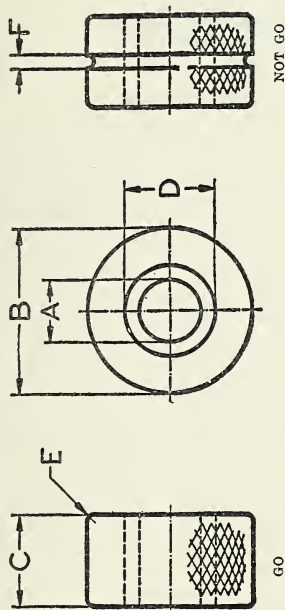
American Gage Design Standard plain ring gages, details of construction.
